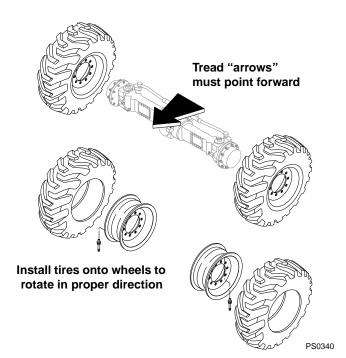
Install wheel and tire assemblies with the directional tread pattern "arrows" facing in the direction of forward travel (also see Fig. 5–4).
